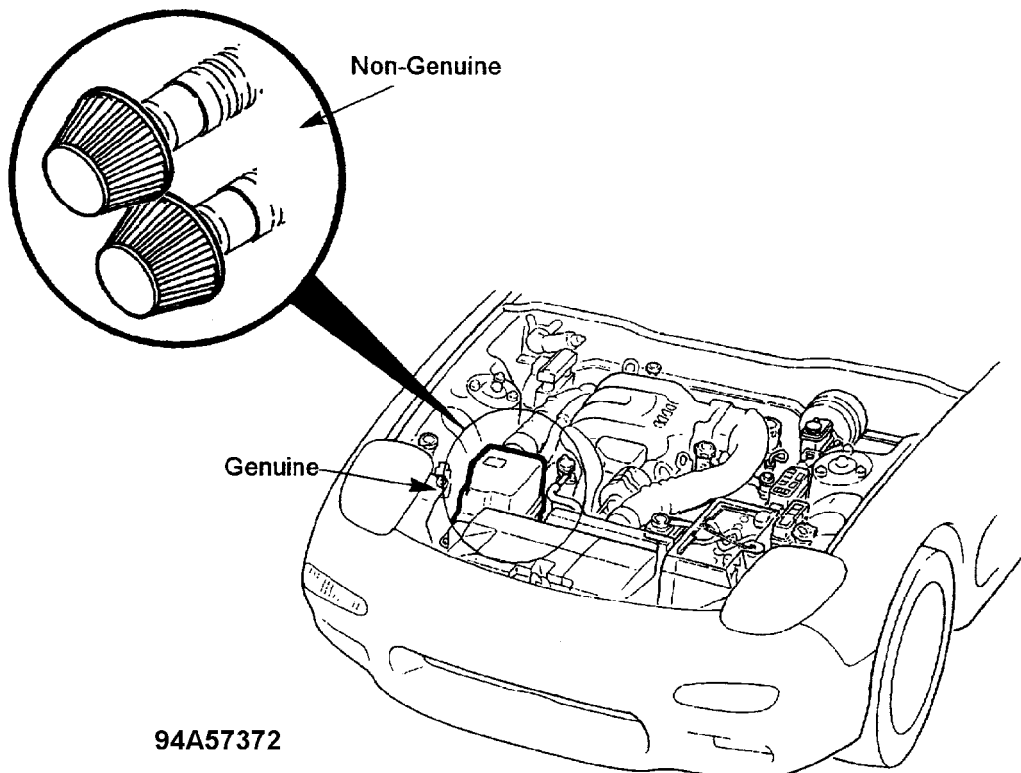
Exploded View of Installed Non-Genuine Air Cleaner
